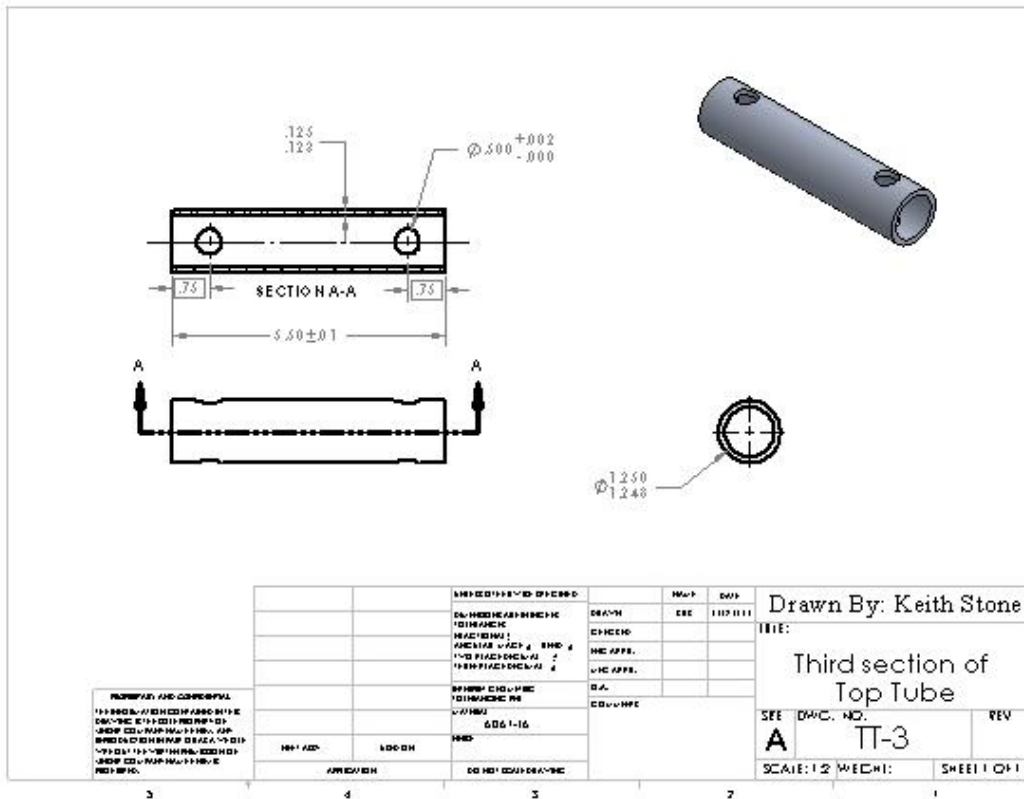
TT-3, Second section top tube from the welded seat tube
